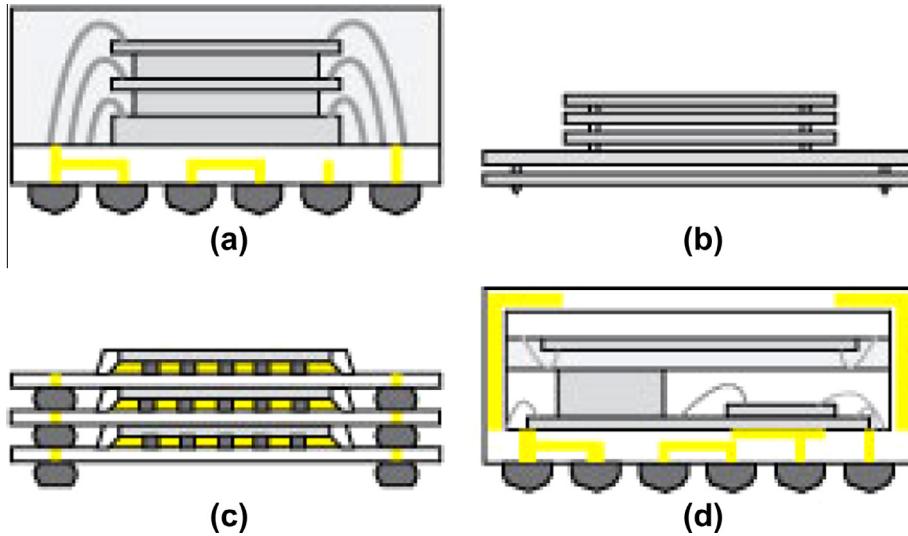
3-D IC stacking options; (a) stacked-die with wirebond; (b) stacked-die with TSV; (c) package-on-package stacking (PoP); and (d) package-in-package stacking (PiP) [6].
